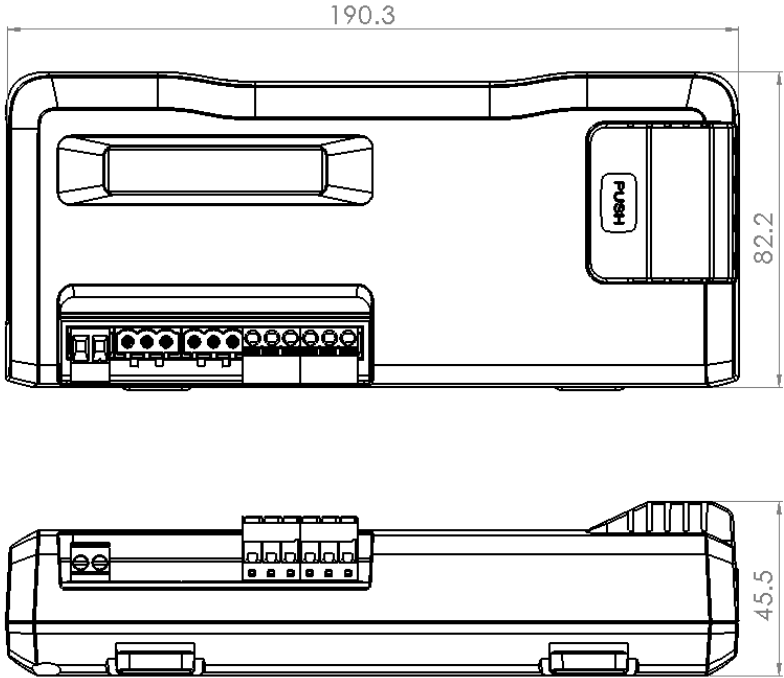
MD-3HD-R-D-N Dimensions in Millimeters.
